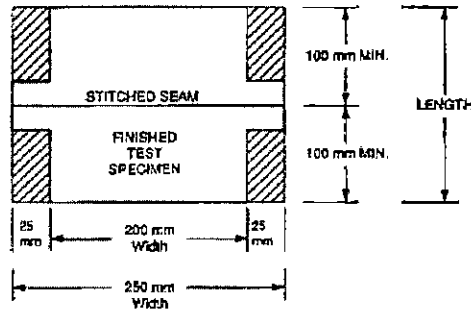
(a) Test specimen preparation for sewn seam (front view) (after ASTM Book of Standard, 2004)
